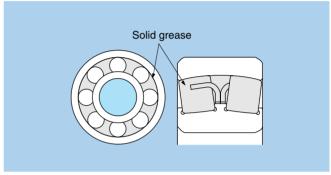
Self-aligning roller bearing with full-pack solid grease (Standard for self-aligning roller bearings)
